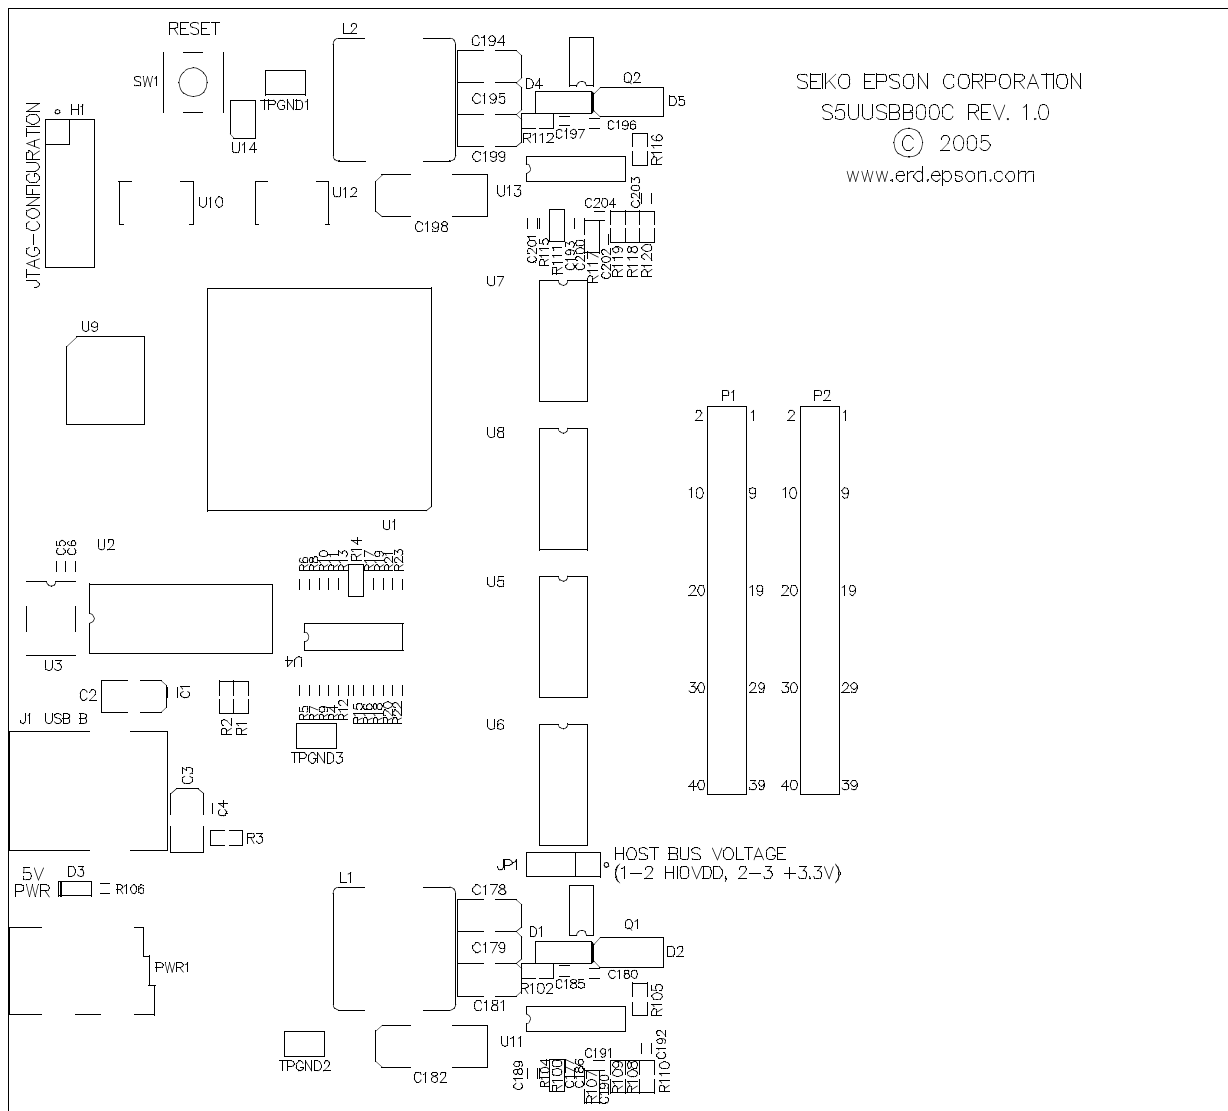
S5U13U00P00C100 PCB Layout (Top)
